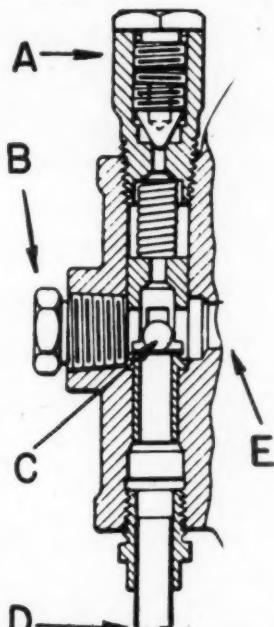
THE COLDSPOT CHECK VALVE AND CHARGING CONNECTION
